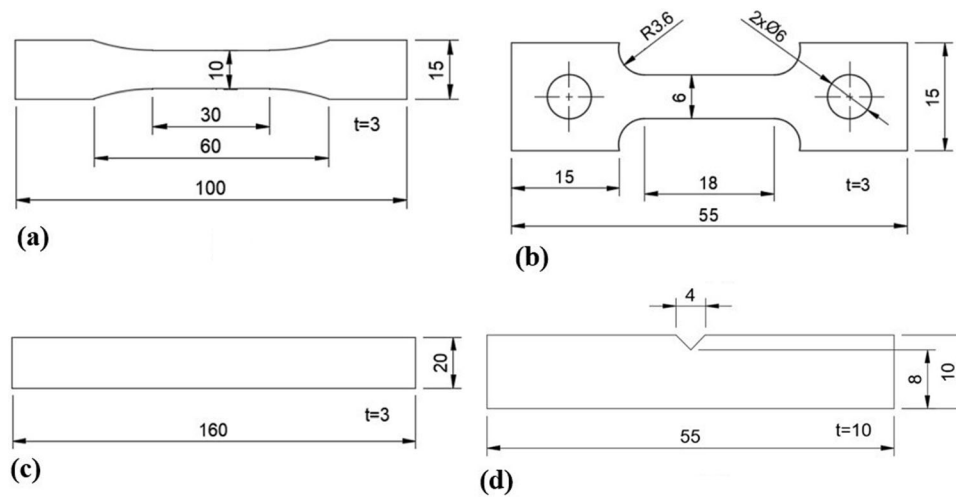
Dimensions of specimens for (a) tensile test; (b) creep test; (c) three-point bending test; (d) impact test
